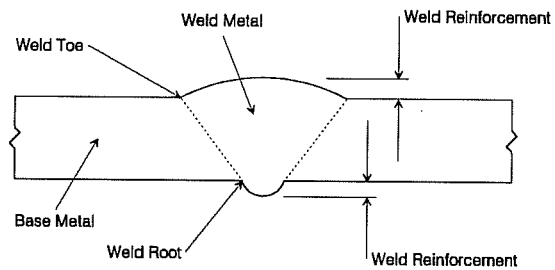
Cross Section Through Typical Butt Weld
